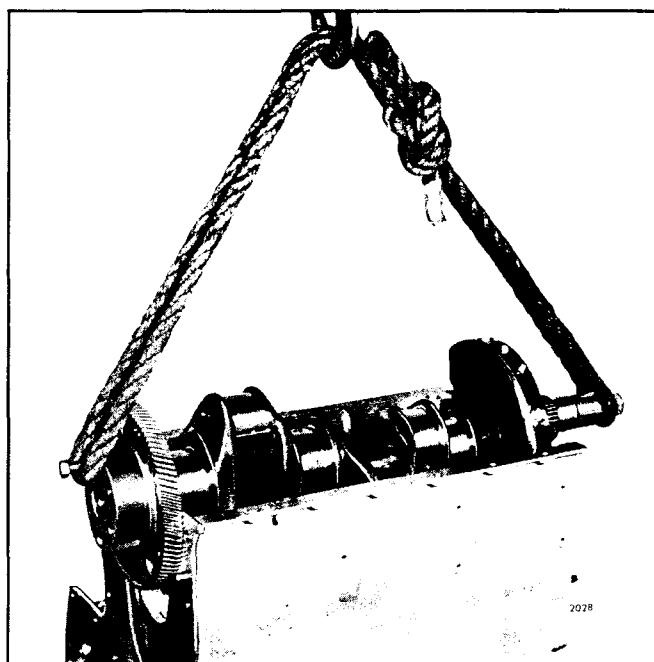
Lifting or Lowering Crankshaft from/into Cylinder Block
